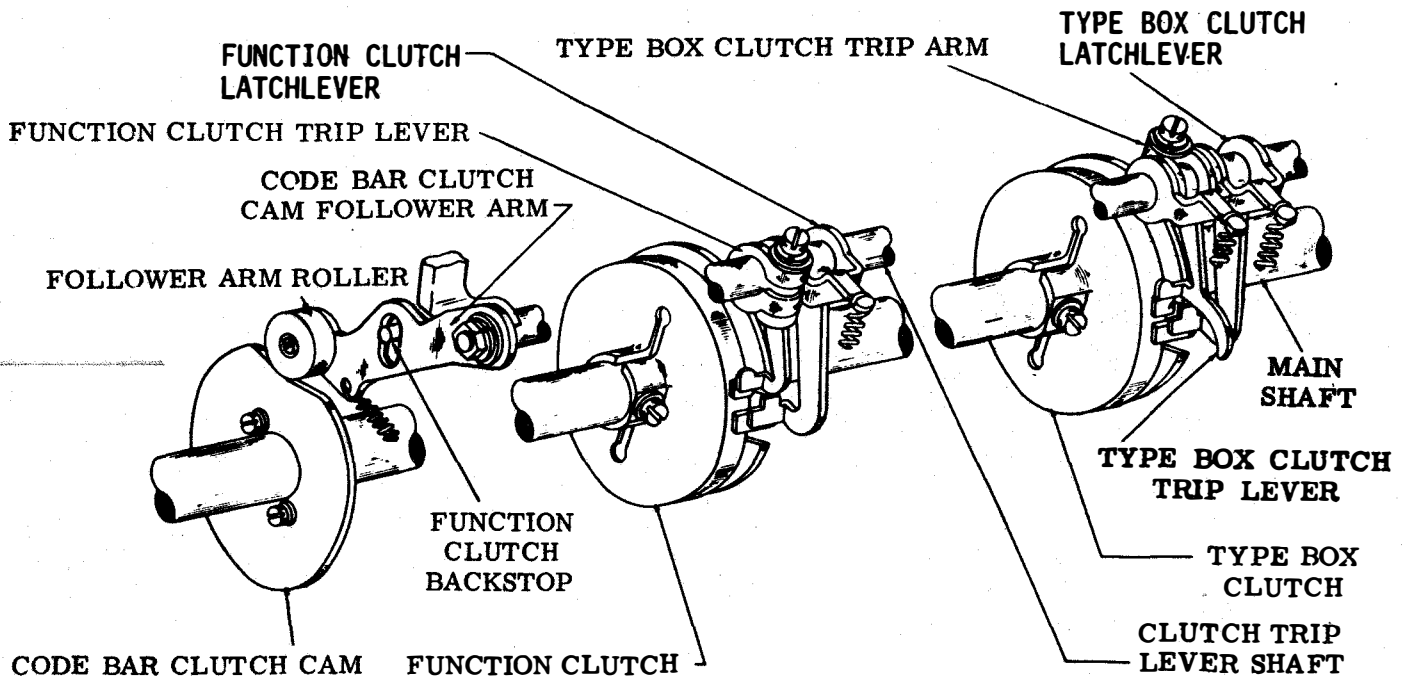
Clutch Trip Mechanism, Right Rear View
